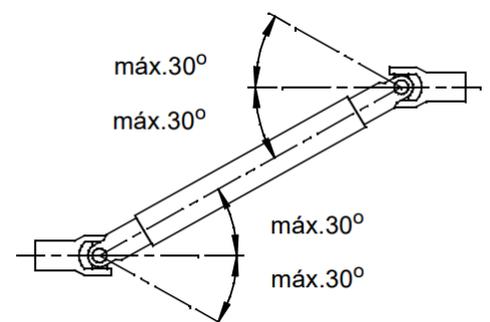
Ex. maximum working angle of the cardan shaft
